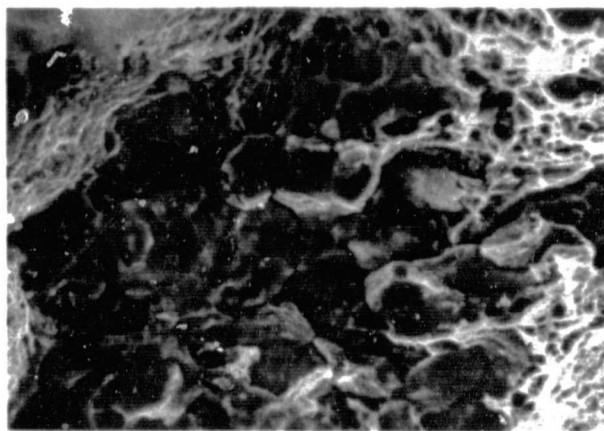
Intergranular fracture and microvoid coalescence on fracture surface of sample failed in delayed failure test.
